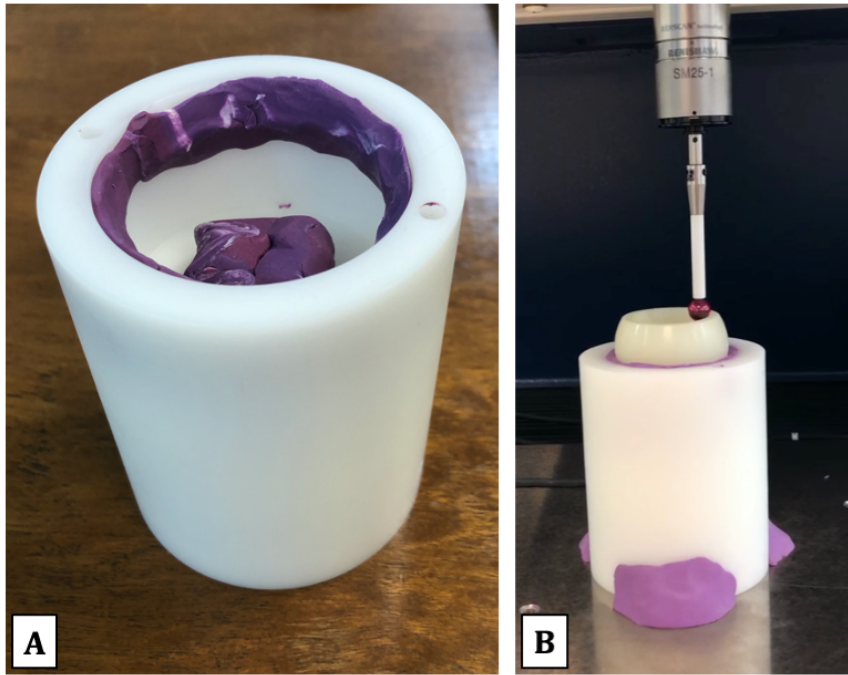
Fixture used during scans of the internal surface of a DM liner. The fixture is cylindrical in shape and contains plasticine at the edges to prevent component damage (A). The fixture is secured onto the CMM bed with additional plasticine (B).
